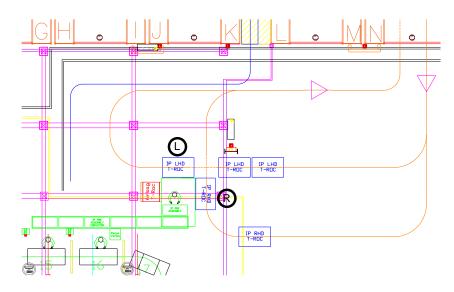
Future Layout of the IP stock and POF to the assembly line.
